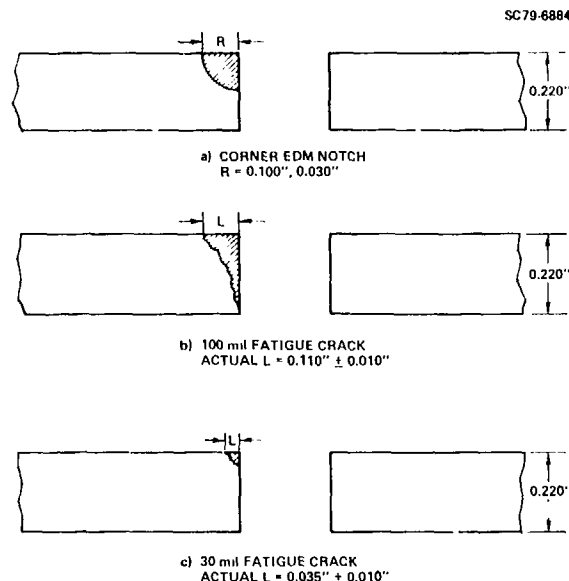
Cross-sectional views of the radial corner notches and fatigue cracks. a) corner EDM notch, b) 100 mil fatigue crack: estimate, c) 30 mil fatigue crack: estimate
